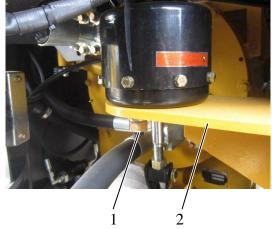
1 Parking brake fixing bolt 2 Support
